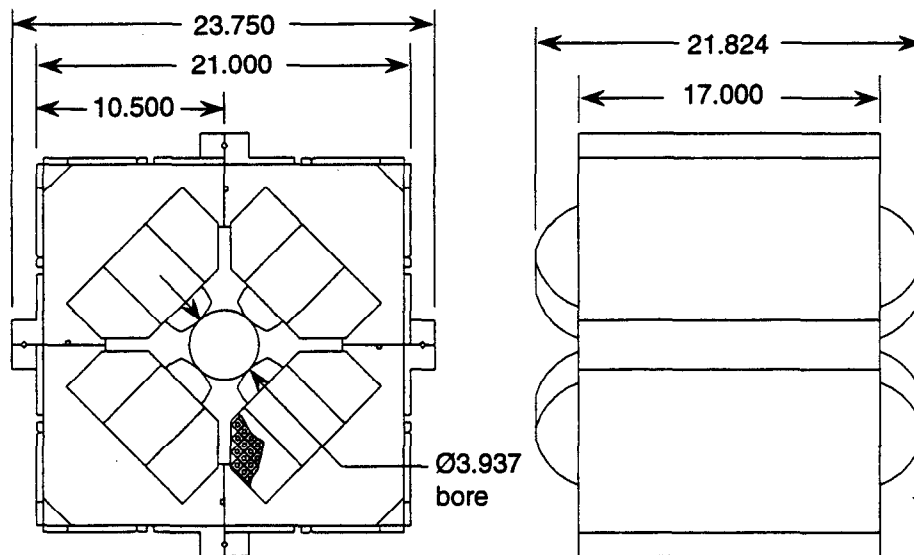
End and side views of an LER quadrupole magnet. Dimensions are given in inches.
